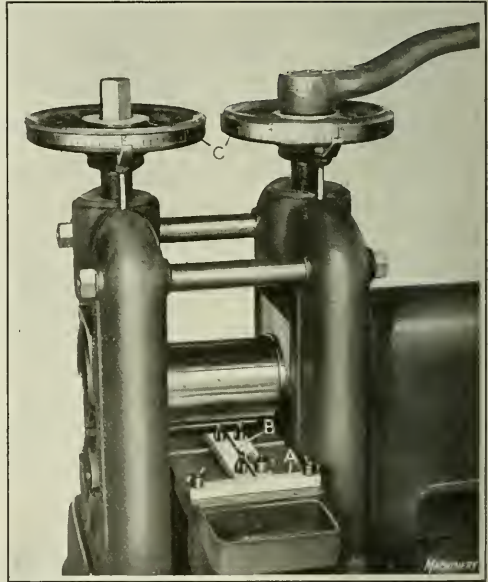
Type of Machine employed for rolling Circular Wire into Flat Ribbon Stock
